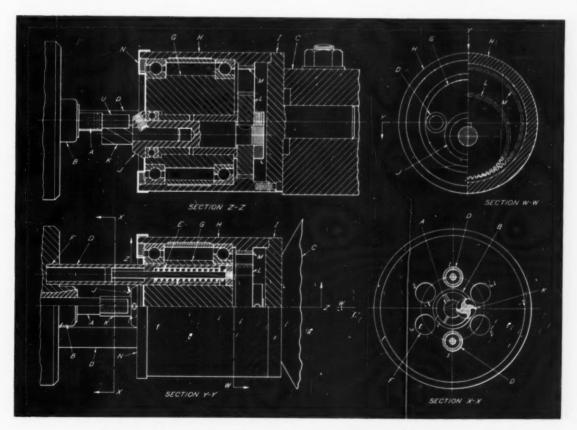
Special milling head used on turret lathe to produce flutes in fuel pump valve
